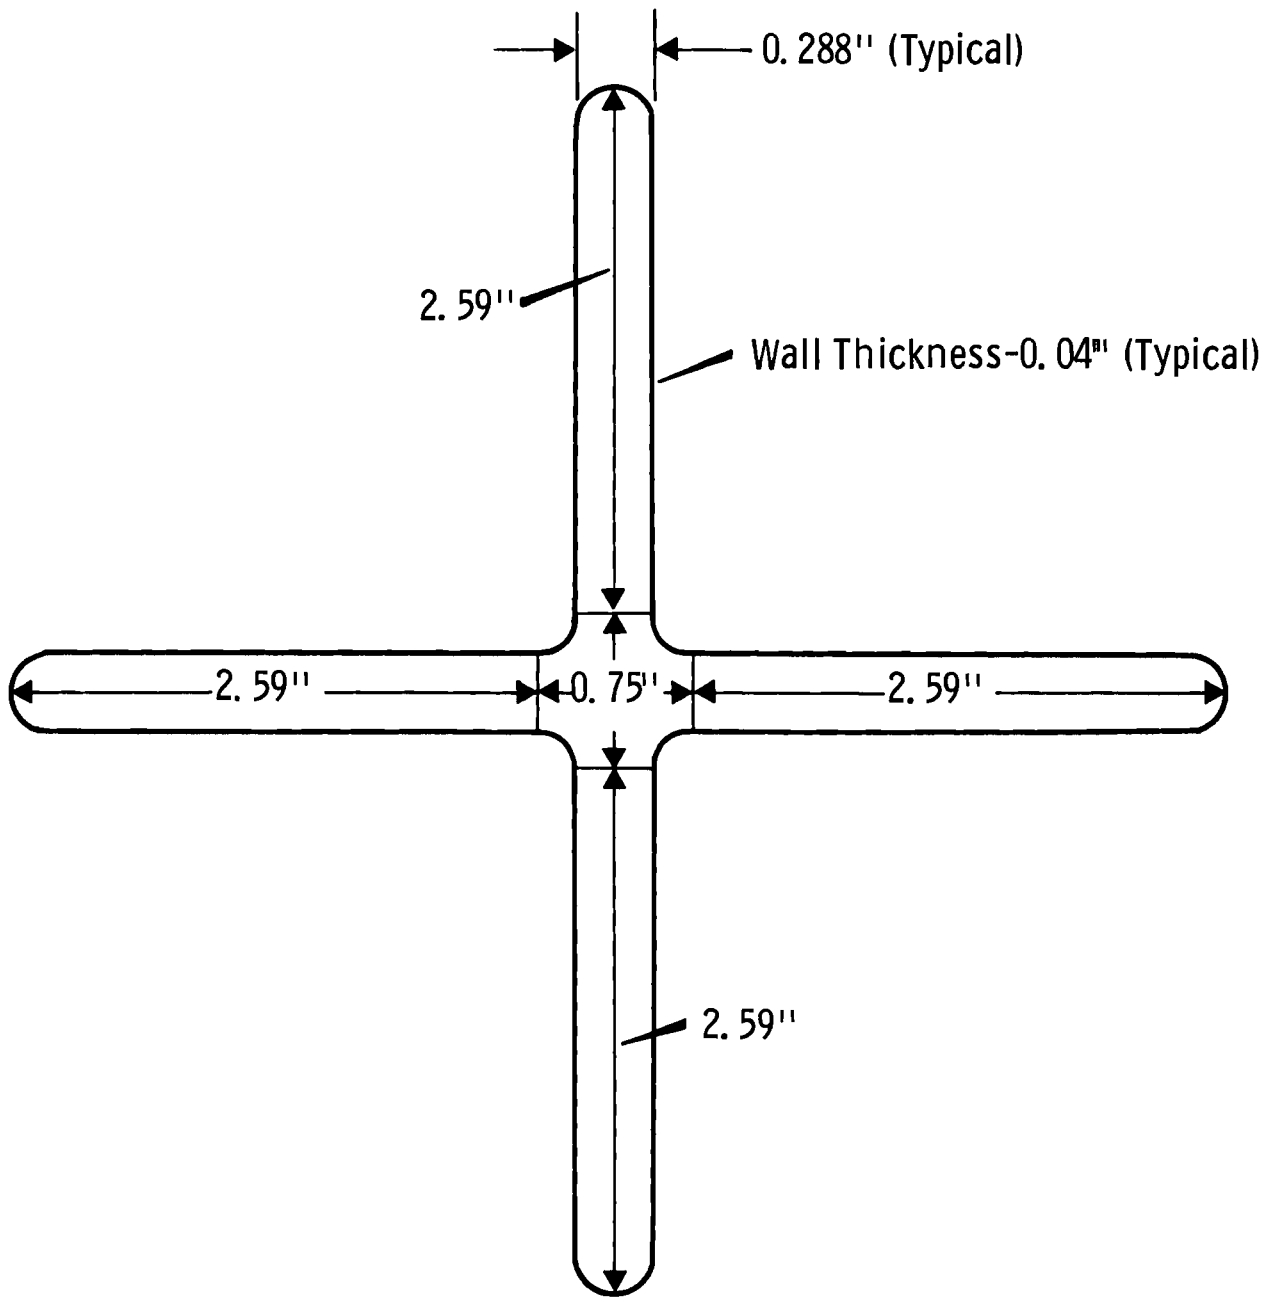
TEST CRUCIFORM BLADE DETAILS
